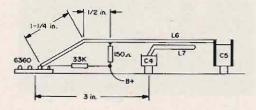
Side view of 6360 tank circuit showing parts placement.
